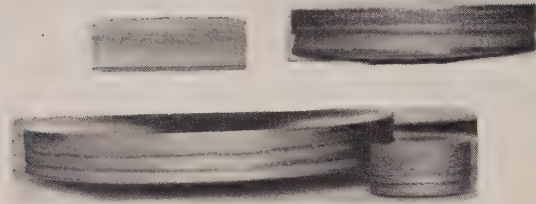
(a).—Sheared Specimens from Tools of Different Diameters.
